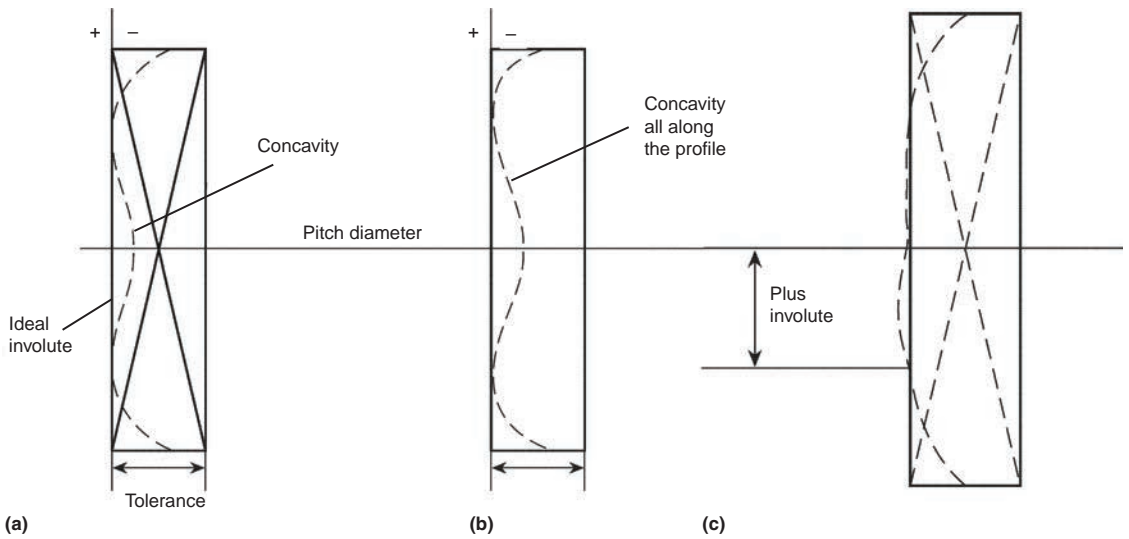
Unacceptable involute profiles for high-speed gears
